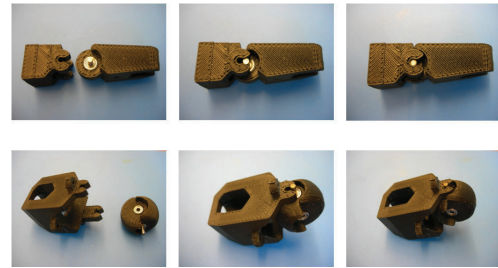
Two examples of assembling a Snap-On joint. Top row: assembling a DIP hinge joint. Bottom row: assembling a MCP ROM-ball on to the finger base
